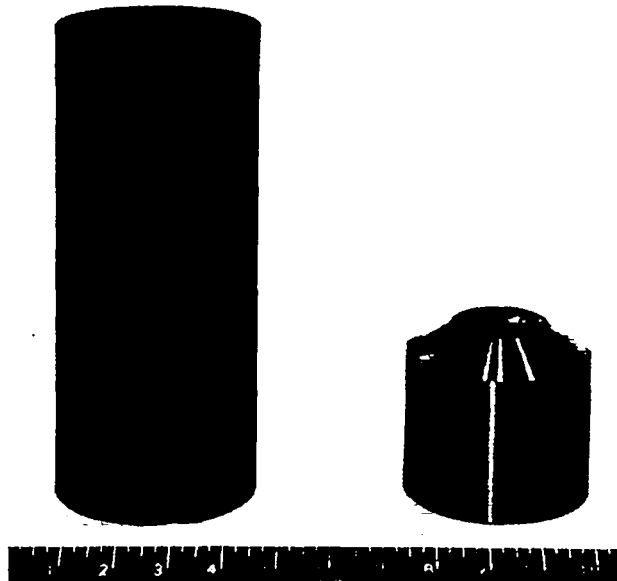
Typical uranium-Alloy casting and extrusion billet.
